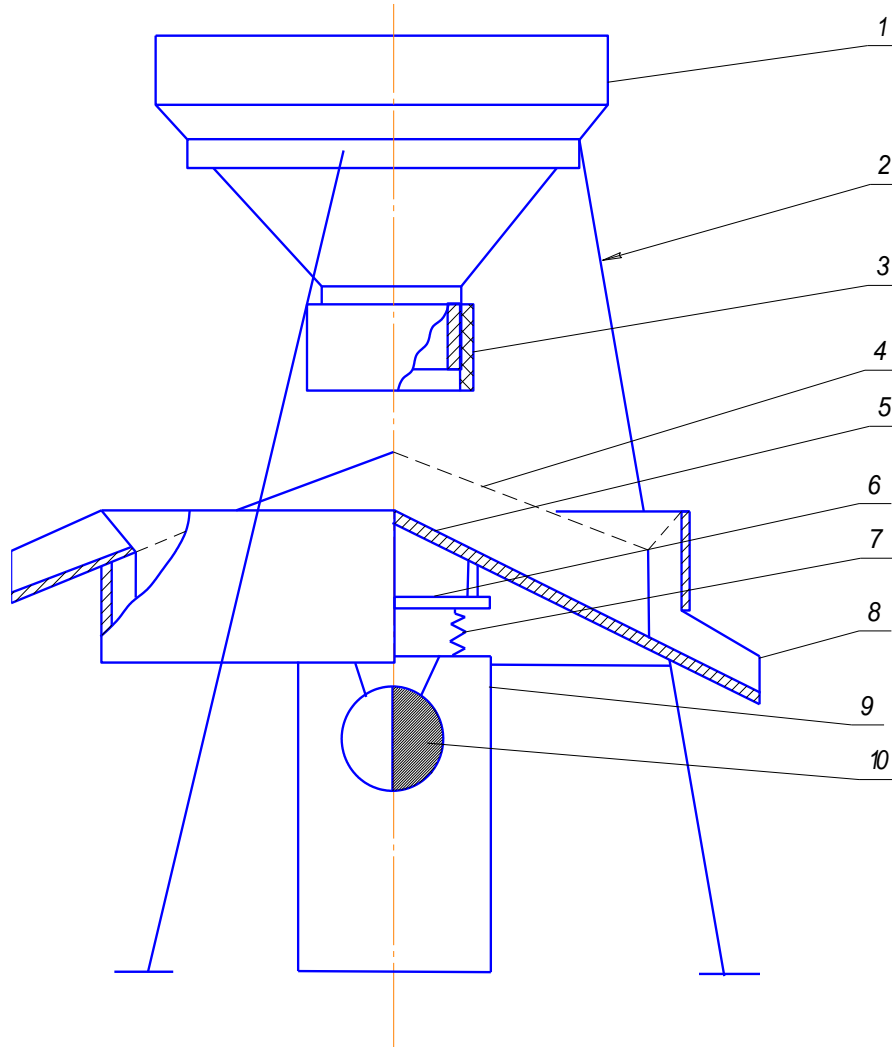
Scheme of vibrating screen with a conical sieve surface: 1 – bunker; 2 – support; 3 – damper; 4 – sieve; 5 – sloping cone; 6 – vibroplatform; 7 – elastic element; 8 – launder; 9 – machine bed; 10 – vibrating exciter
